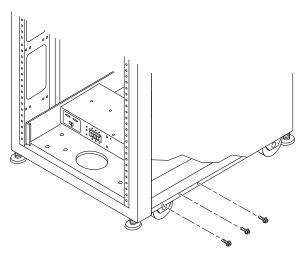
Removing the Bottom Right Front Mounting Screws
